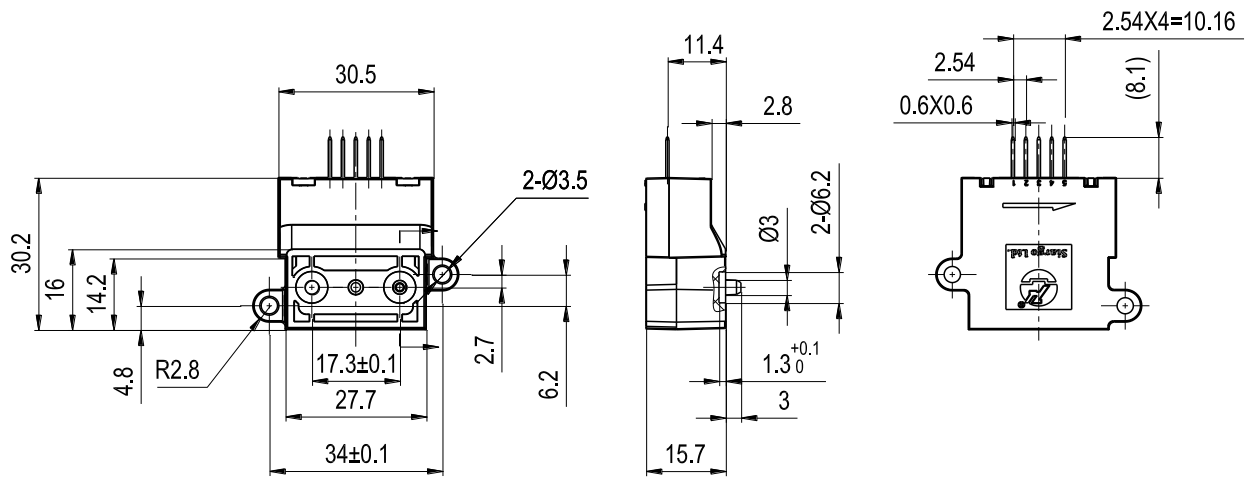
FS5001L: 0...15SLPM model mechanical dimensions.
